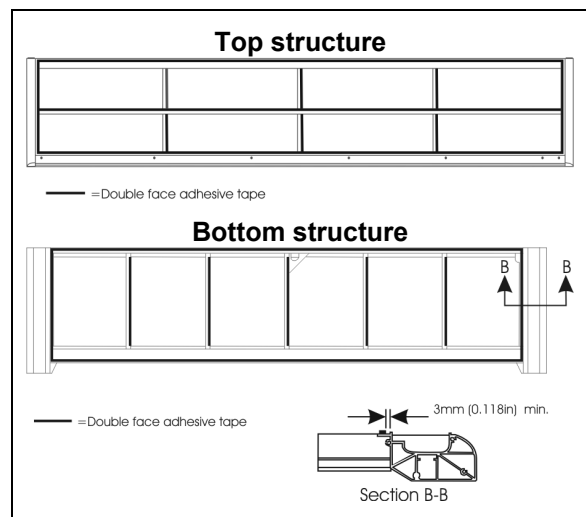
TOP AND BOTTOM PANEL INSTALLATION - DOUBLE FACE ADHESIVE TAPE APPLICATION
